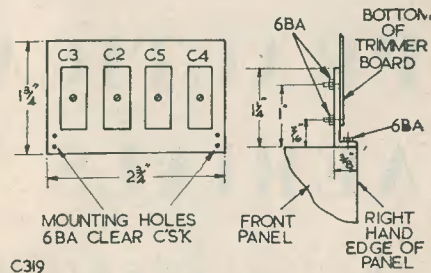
(a): The dimensions of the trimmer board, and the disposition of the trimmers upon it.
